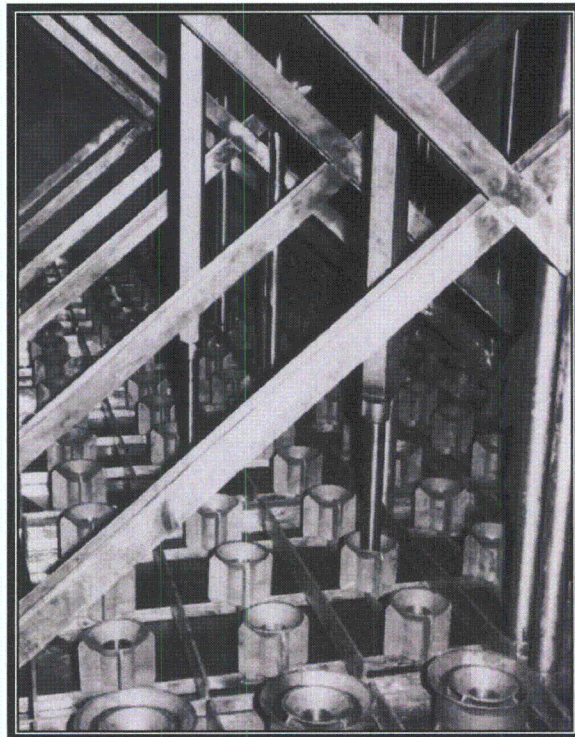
Lower, or nozzle end subassembly guide (Courtesy DECo)
